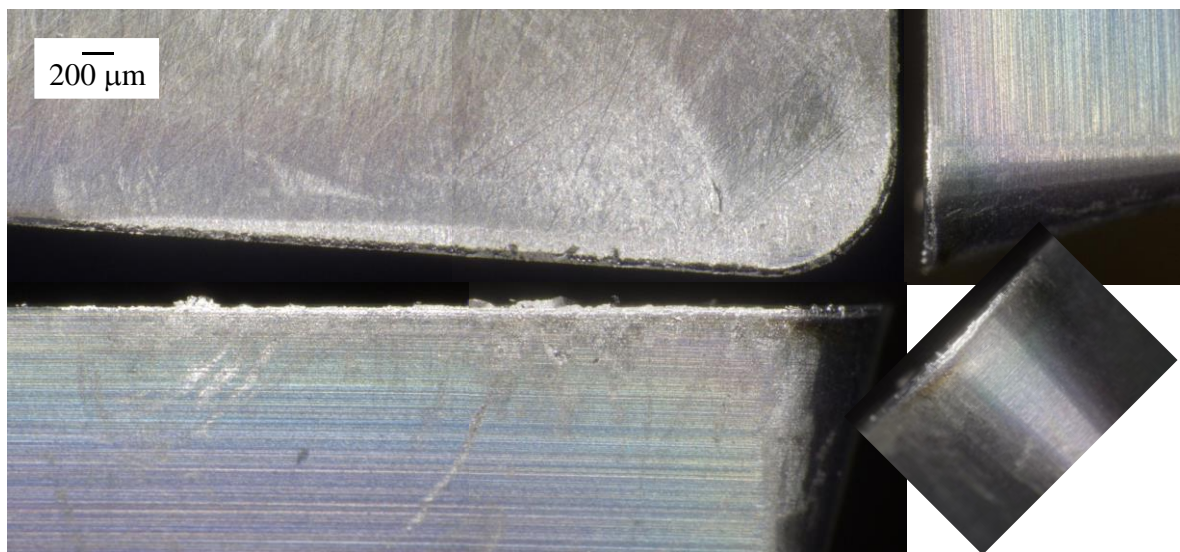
Each face of the insert in tool axis offset 0 mm after tool life experiment.
